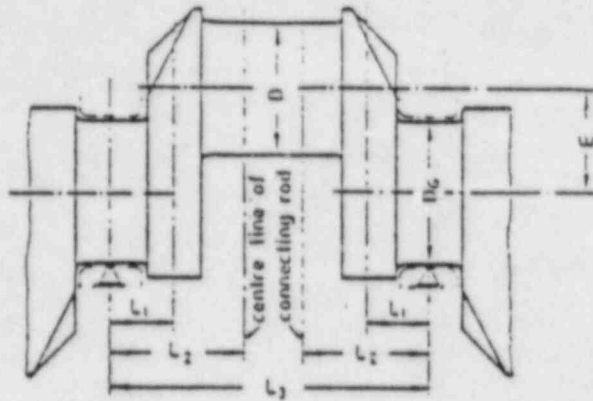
Crank throw for engine with 2 adjacent connecting rods
